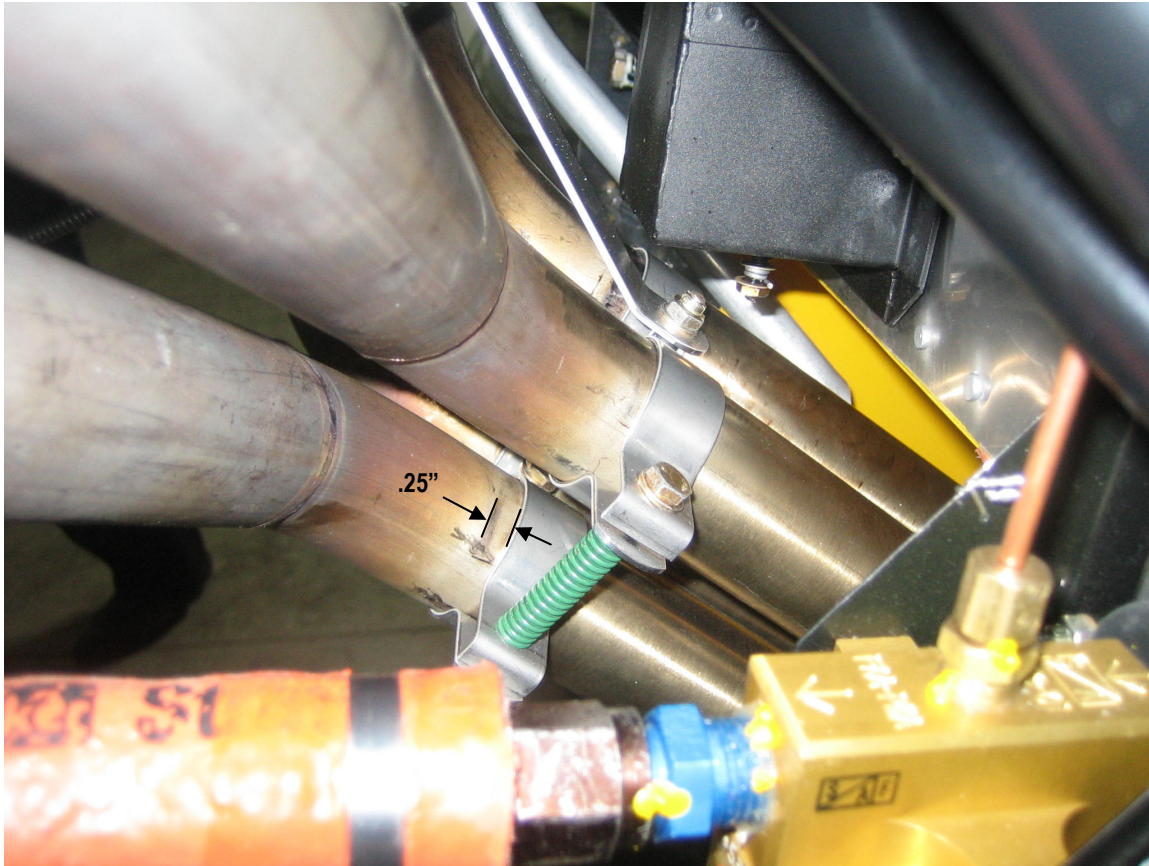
EXHAUST CLAMP POSITION ON EXHAUST TUBES
